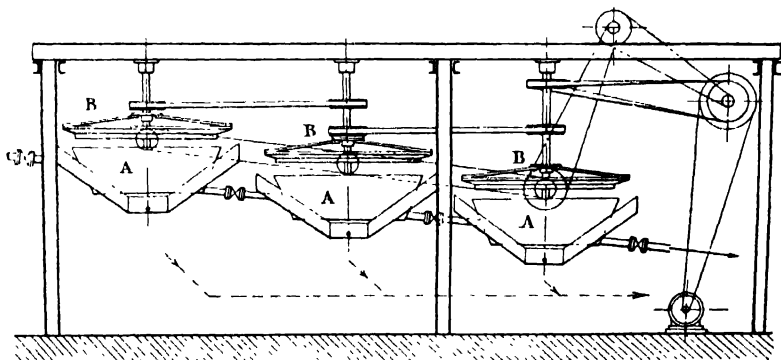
Arrangement of Kleinbentincck Units at Emma Colliery, Dutch State Mines.
